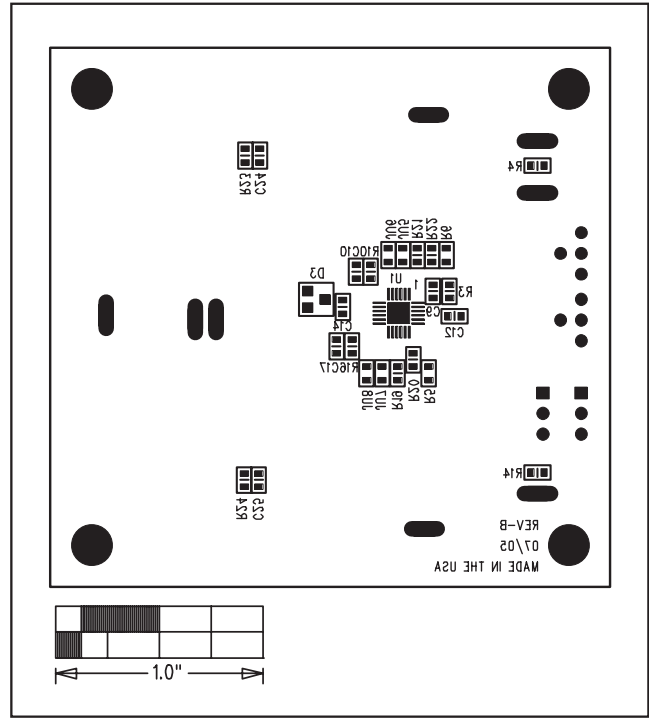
MAX8716 EV Kit Component Placement Guide—Solder Side
